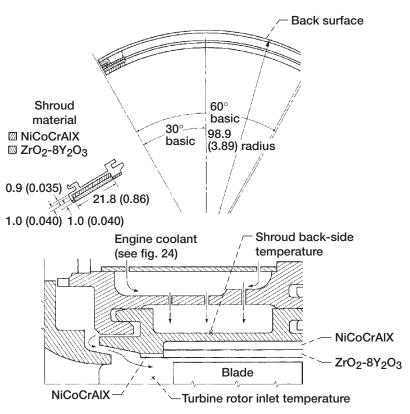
Schematic of ceramic-coated shroud seal (dimensions in millimeters and inches). (Biesiadny et al., 1985.)
